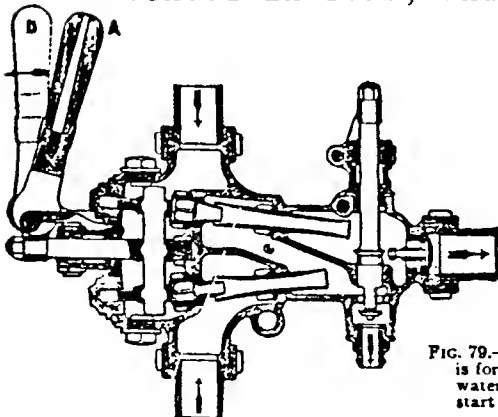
Sectional view of the Korting double tube injector. The lower tube is for lifting the water to the injector, and the upper tube for forcing the water in the boiler. A is the closed position of the operating handle. To start the injector, the handle is moved slowly in the direction D.
